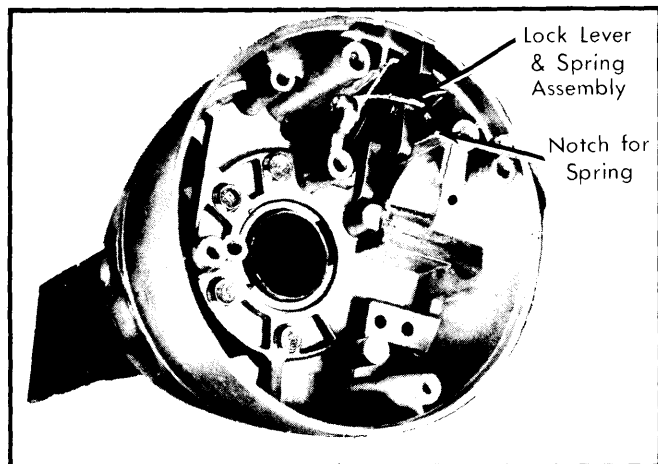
Lock Lever and Spring Assembly Installed in Housing
